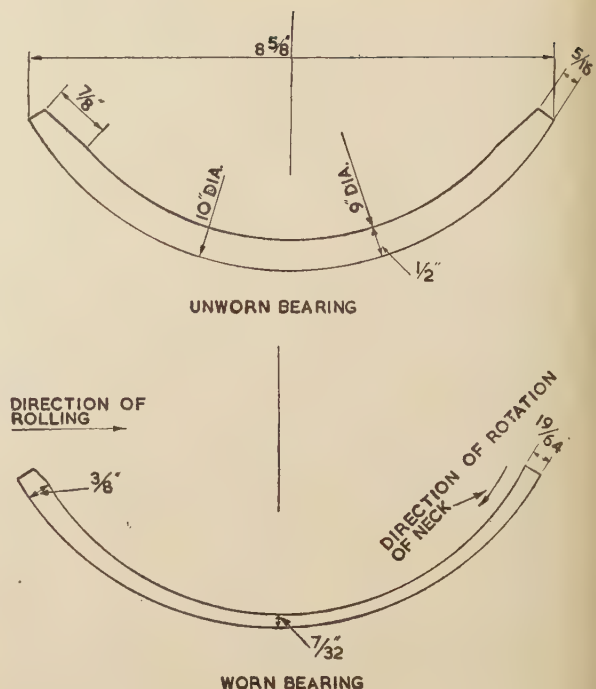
FIG. B—Effect of wear on a fabric bearing in a 15-in. three-high non-reversing mill (bottom roll)
